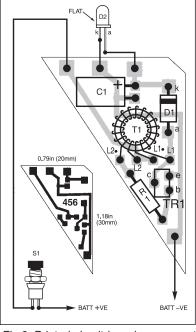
Printed circuit board component layout (twice-size), wiring and full-size copper foil master pattern. Note the components are mounted, surface mount style, directly on the copper pads. The completed circuit board is shown above right.
